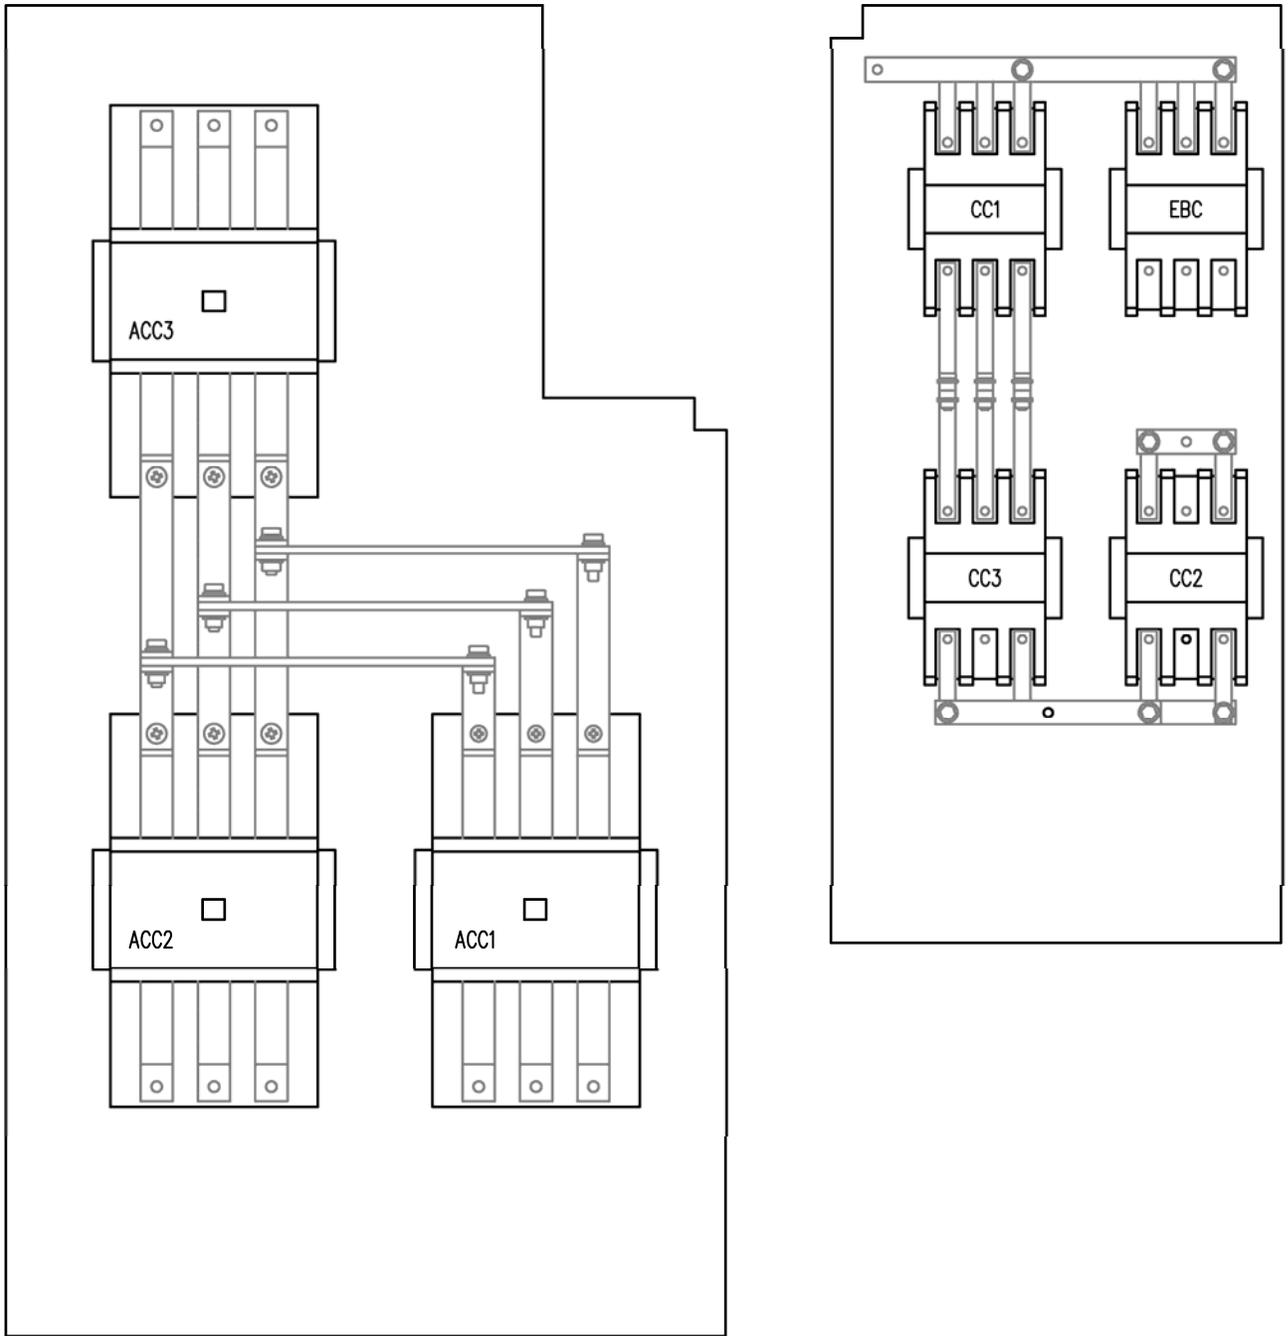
Electrical Cabinet with Doors Removed, Front View
